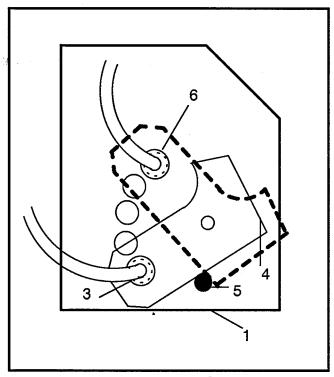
ACCELERATOR SWITCH ADJUSTMENT
